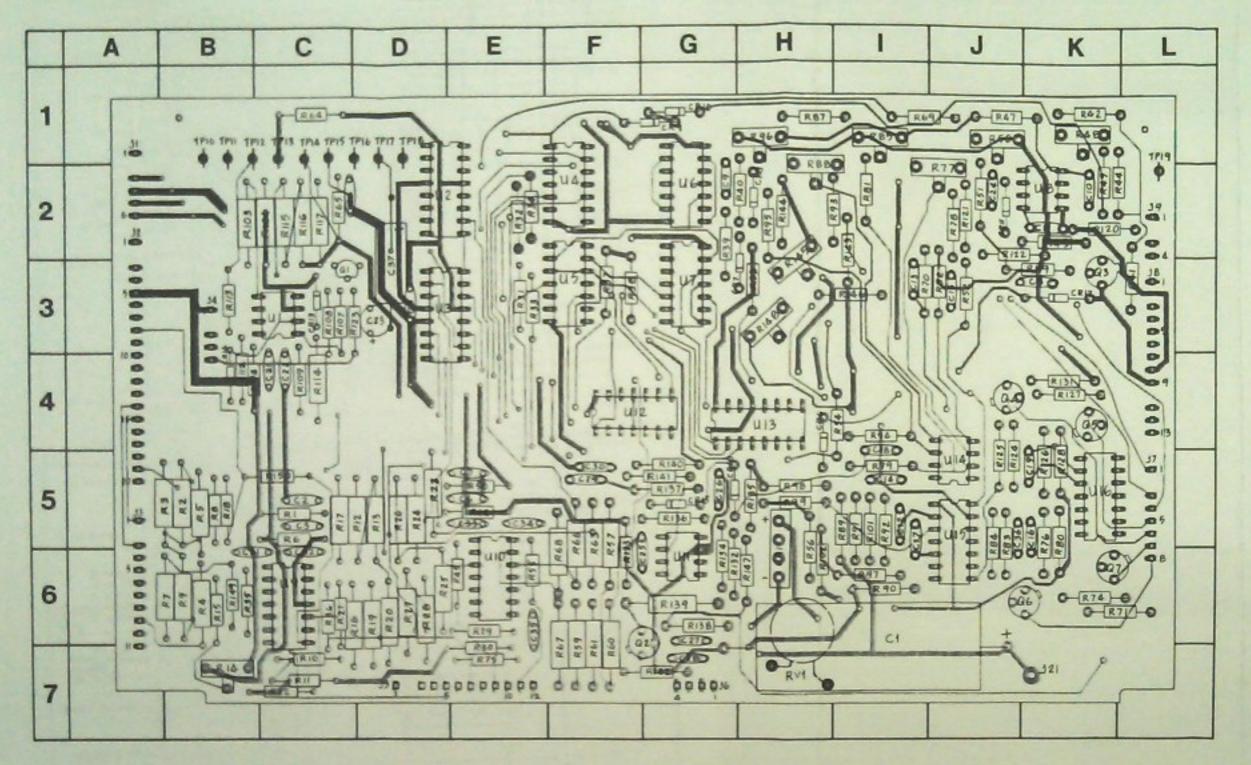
HIGH VOLTAGE PCB ASSEMBLY
